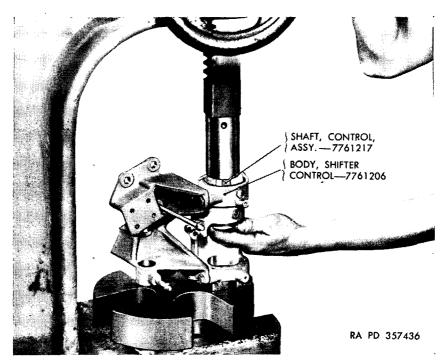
Pressing shaft out of bearing in gunner's shifter control housing.
